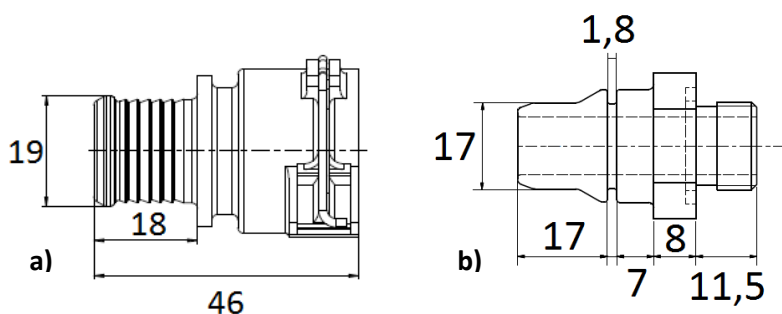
a) Mating connection b) Quick connector (screwed on the charger cooling port)
